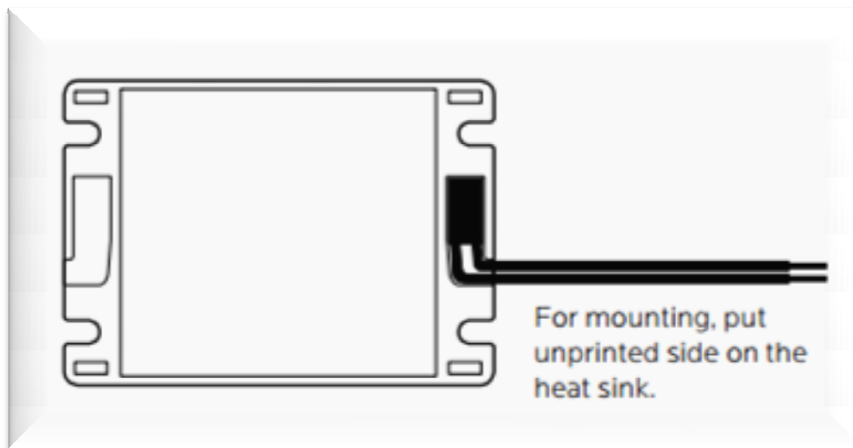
Mounting the Switch with its unprinted side (elfaelektronikka 2012)
